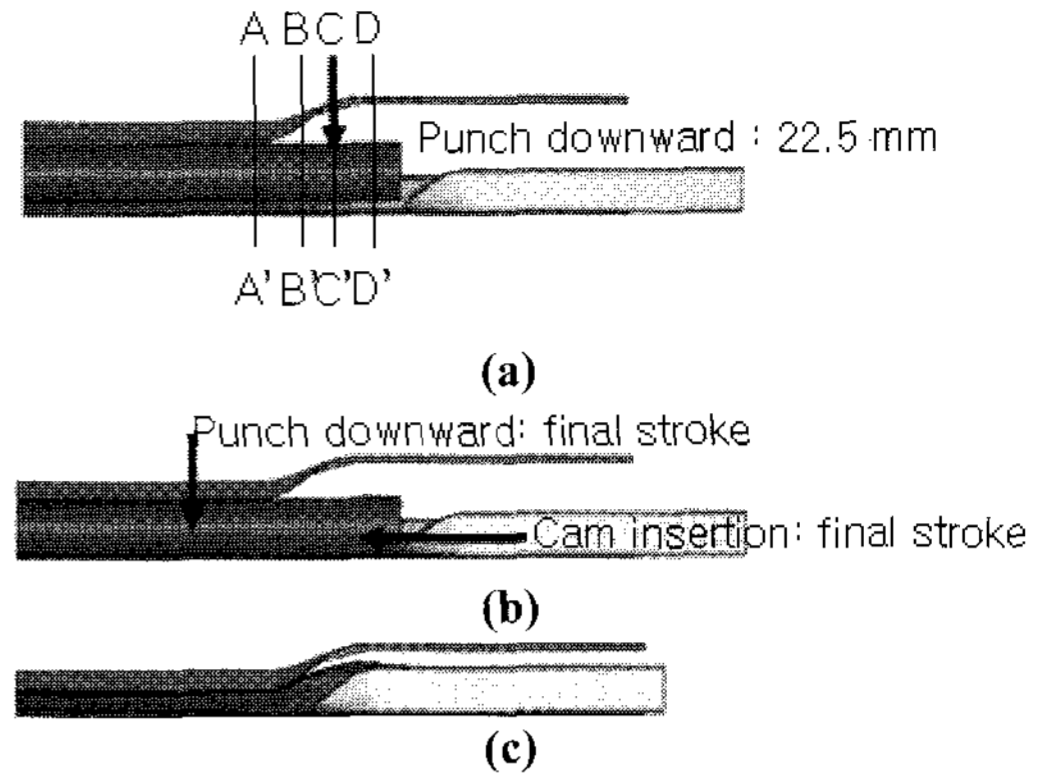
Relative movement of the tools and the tube with the initial design during the OP10 process: (a) first punch forming process; (b) punch forming and cam inserting process; (c) final shape
